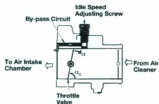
Throttle Body Side View (based on image courtesy of Toyota Motor Sales)
